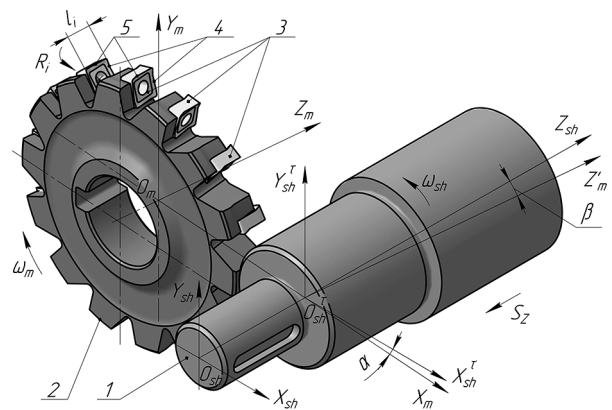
Scheme of roughing and finishing milling of a cylindrical surface of a shaft
